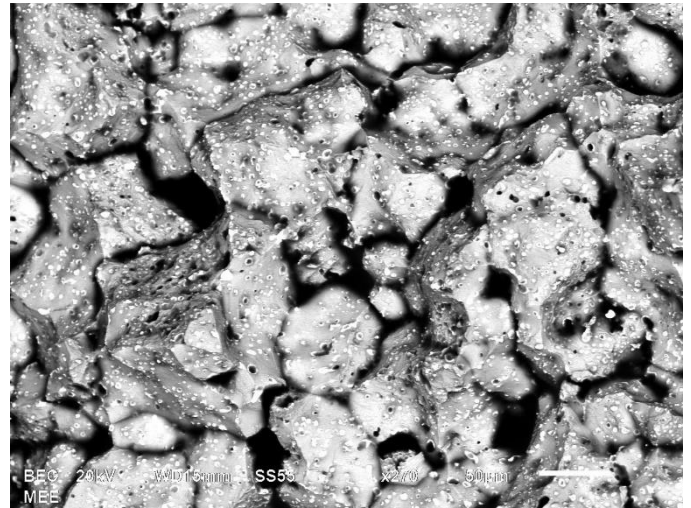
270X Fracture Surface Fitting 2 – Backscatter Mode
